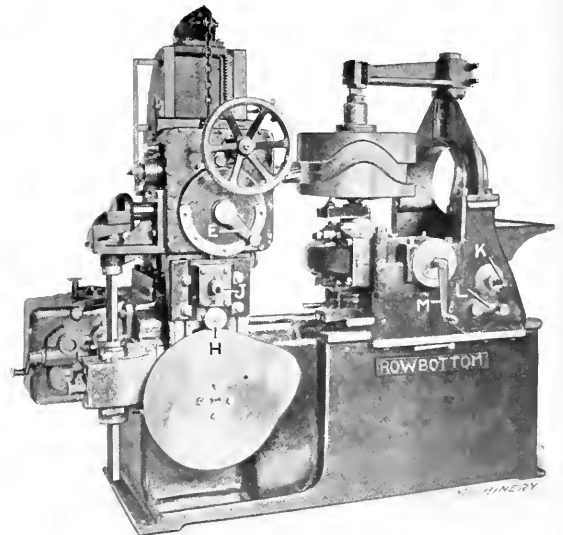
Rowbottom Machine engaged in milling a Cylindrical Cam
